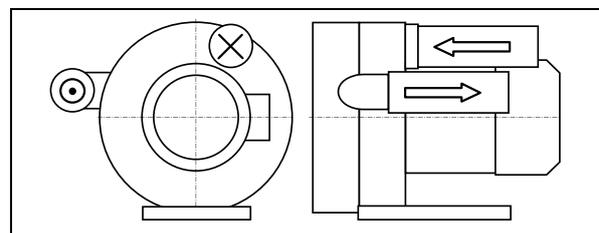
2BH1810 (two-impeller pump-motor unit with a two-stage design)
